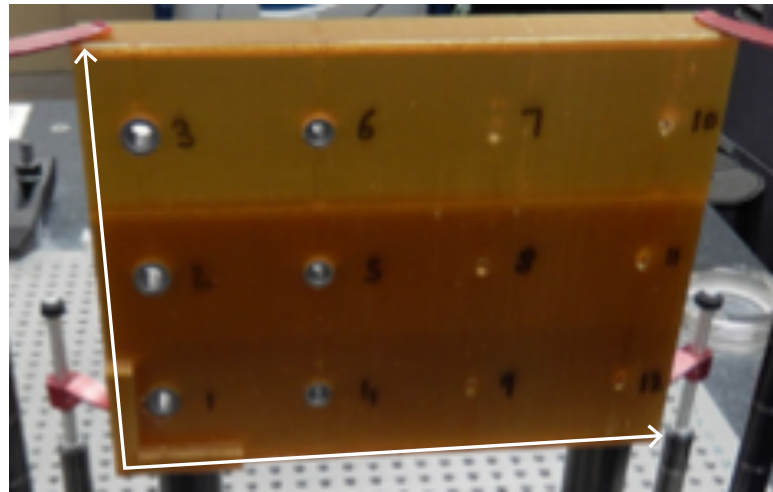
View of the printed geometry with inserted bushings. Solid arrows indicate measurement direction.
